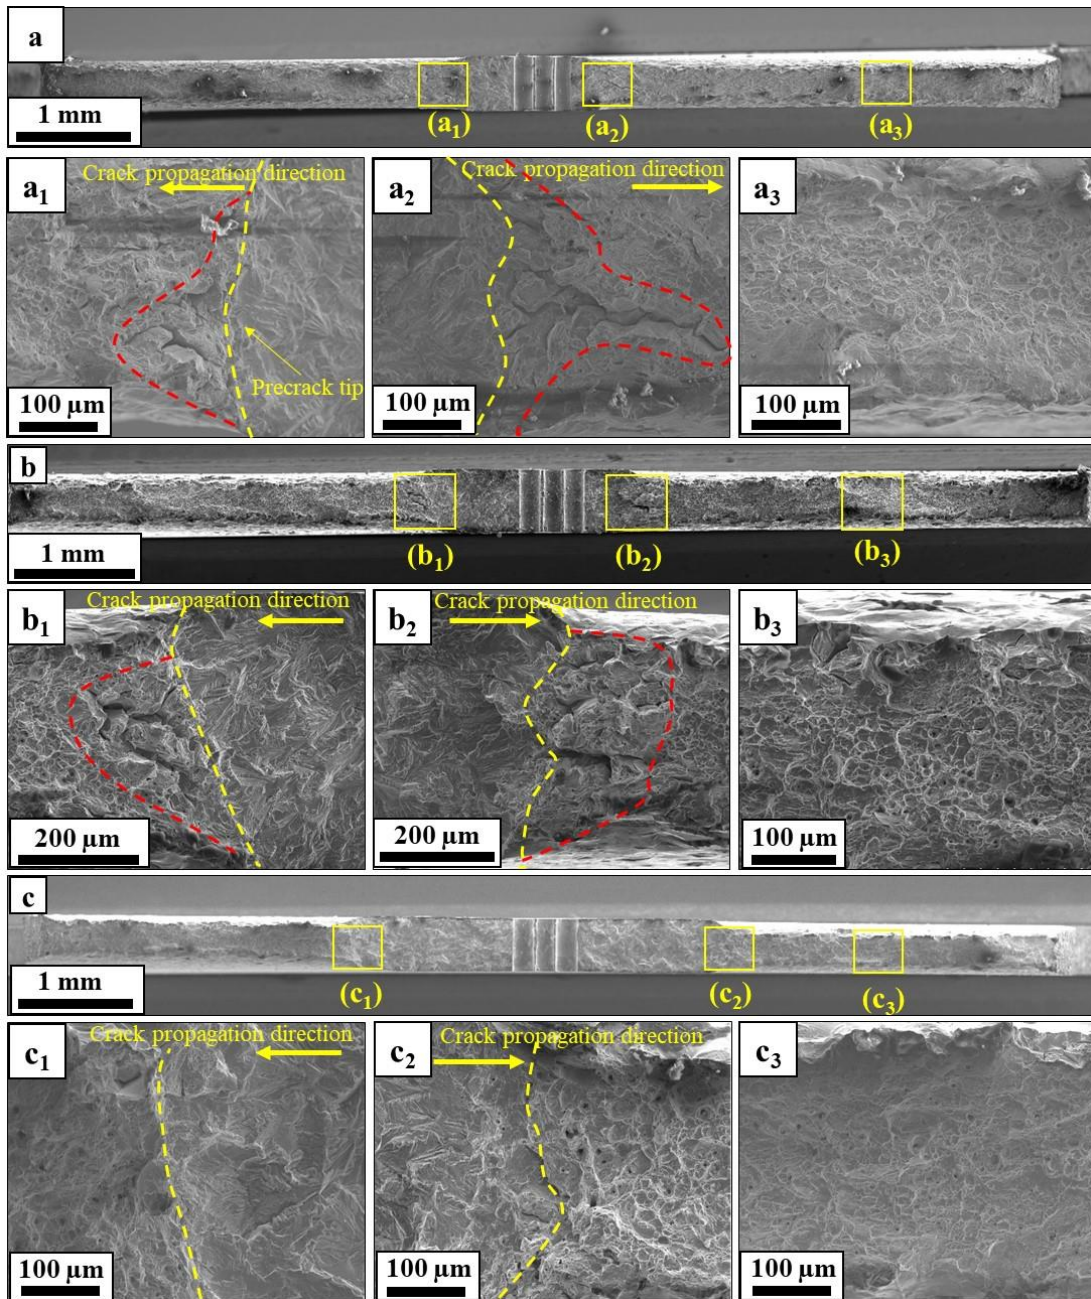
(a), (b) and (c) overall images of fracture surfaces of hydrogen-charged specimen with 1, 1.8 and 3.2 mm precracks, respectively. X₁ and X₂ show the both sides of the fracture surfaces including precrack tips. For 1 and 1.8 mm precracks the fracture surfaces in front of the crack tip display the combination of intergranular and quasi-cleavage features, while, 3.2 mm precracked specimen show ductile feature as a void coalescence similar to the uncharged specimens. The remain parts of the fracture surface covered by dimples as shown in Figs. (a₃), (b₃) and (c₃). The yellow and red dashed-lines indicate the precrack tip and enclosed the brittle zone, respectively.
